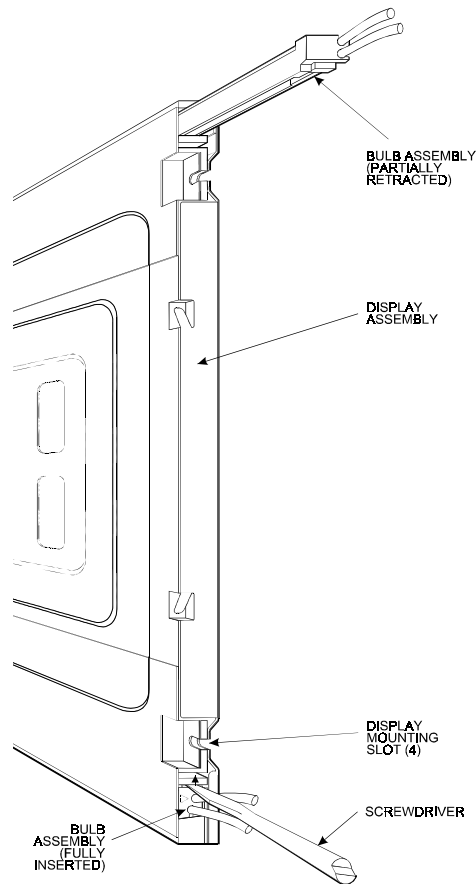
Figure Appendix D -6. Model #LQ12S41 Bulb Assembly
